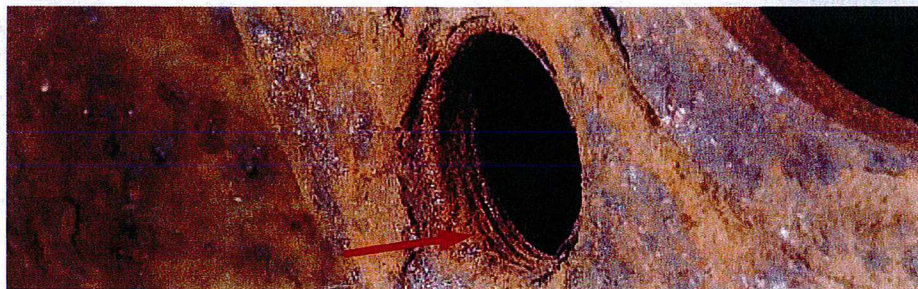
Witness marks observed on the internal surfaces of the lug nut holes consistent with stud thread contact.
